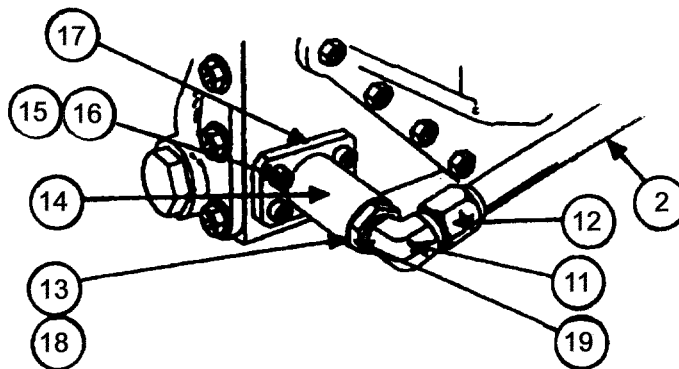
Adapter, Elbow and Oil Fill Tube Assembly.
